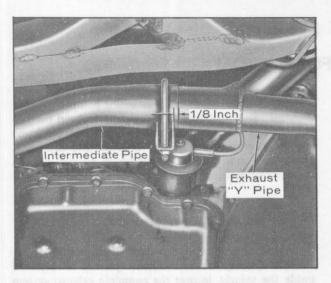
Intermediate Pipe at Exhaust Pipe
